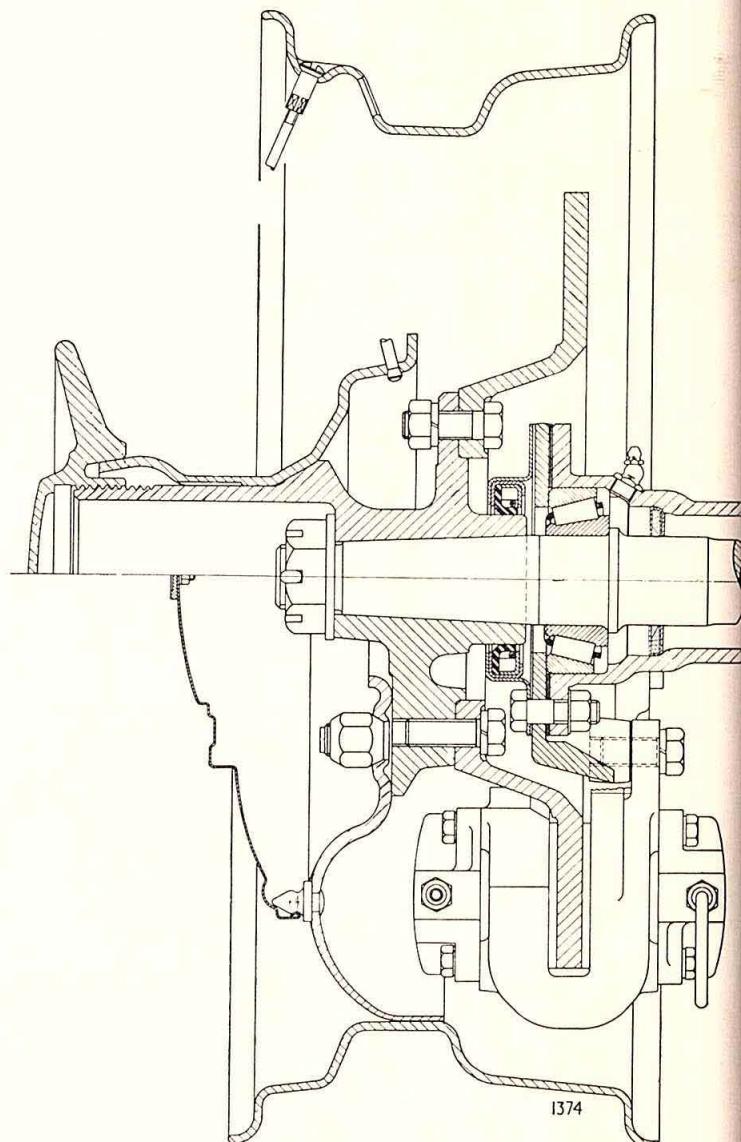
Sectioned plan view of the disc brake hub arrangement. The upper half of the illustration shows a wire spoke wheel hub; the lower half shows a disc wheel hub.
